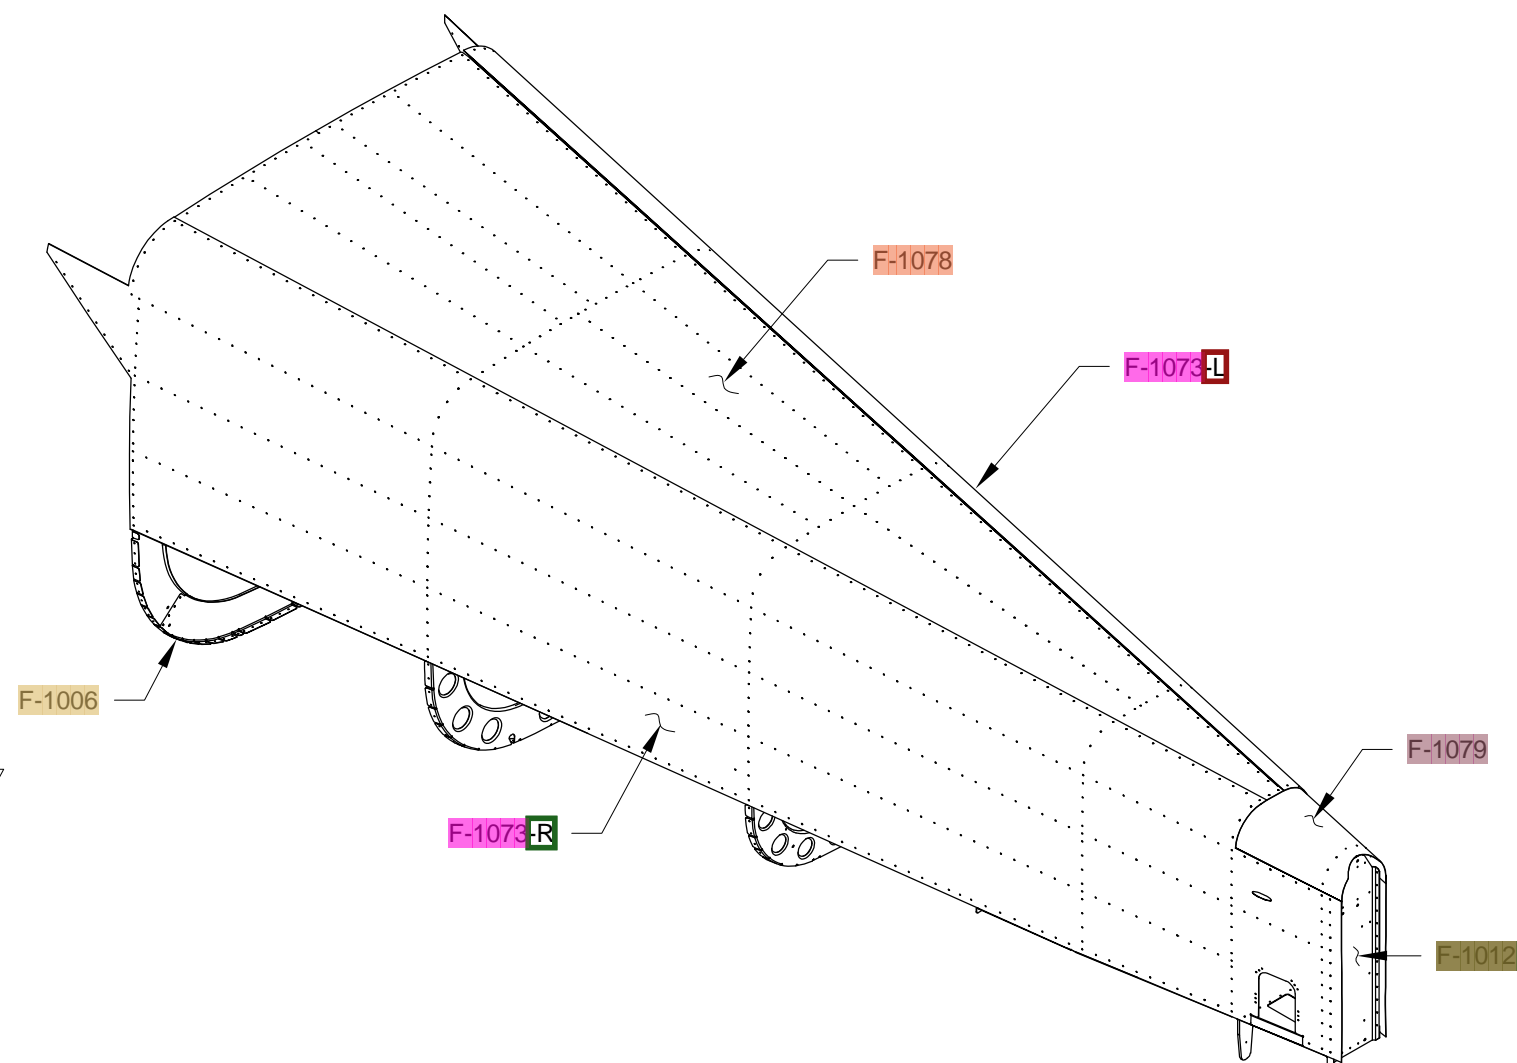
DRILLING THE BOTTOM SKINS, SIDE SKINS, AND FRAMES AND BULKHEADS
